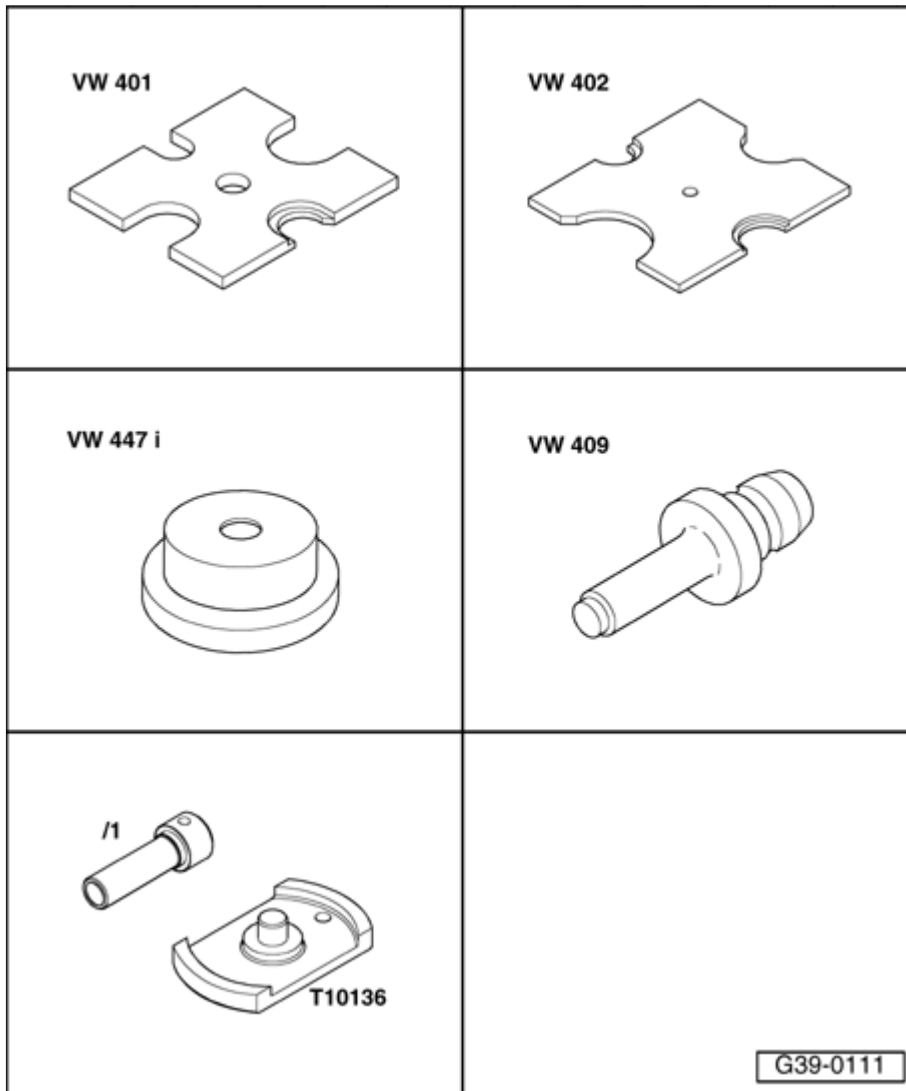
Identifying Special Tools -- Flanged Shaft Oil Seal (Rear), Replacing
